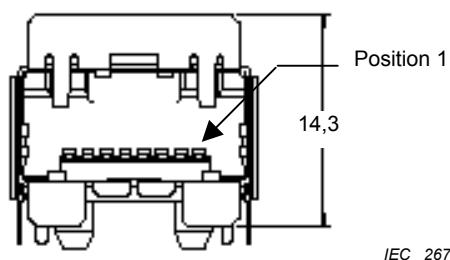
Top view fixed board connector (XB) right angle (version 2)
